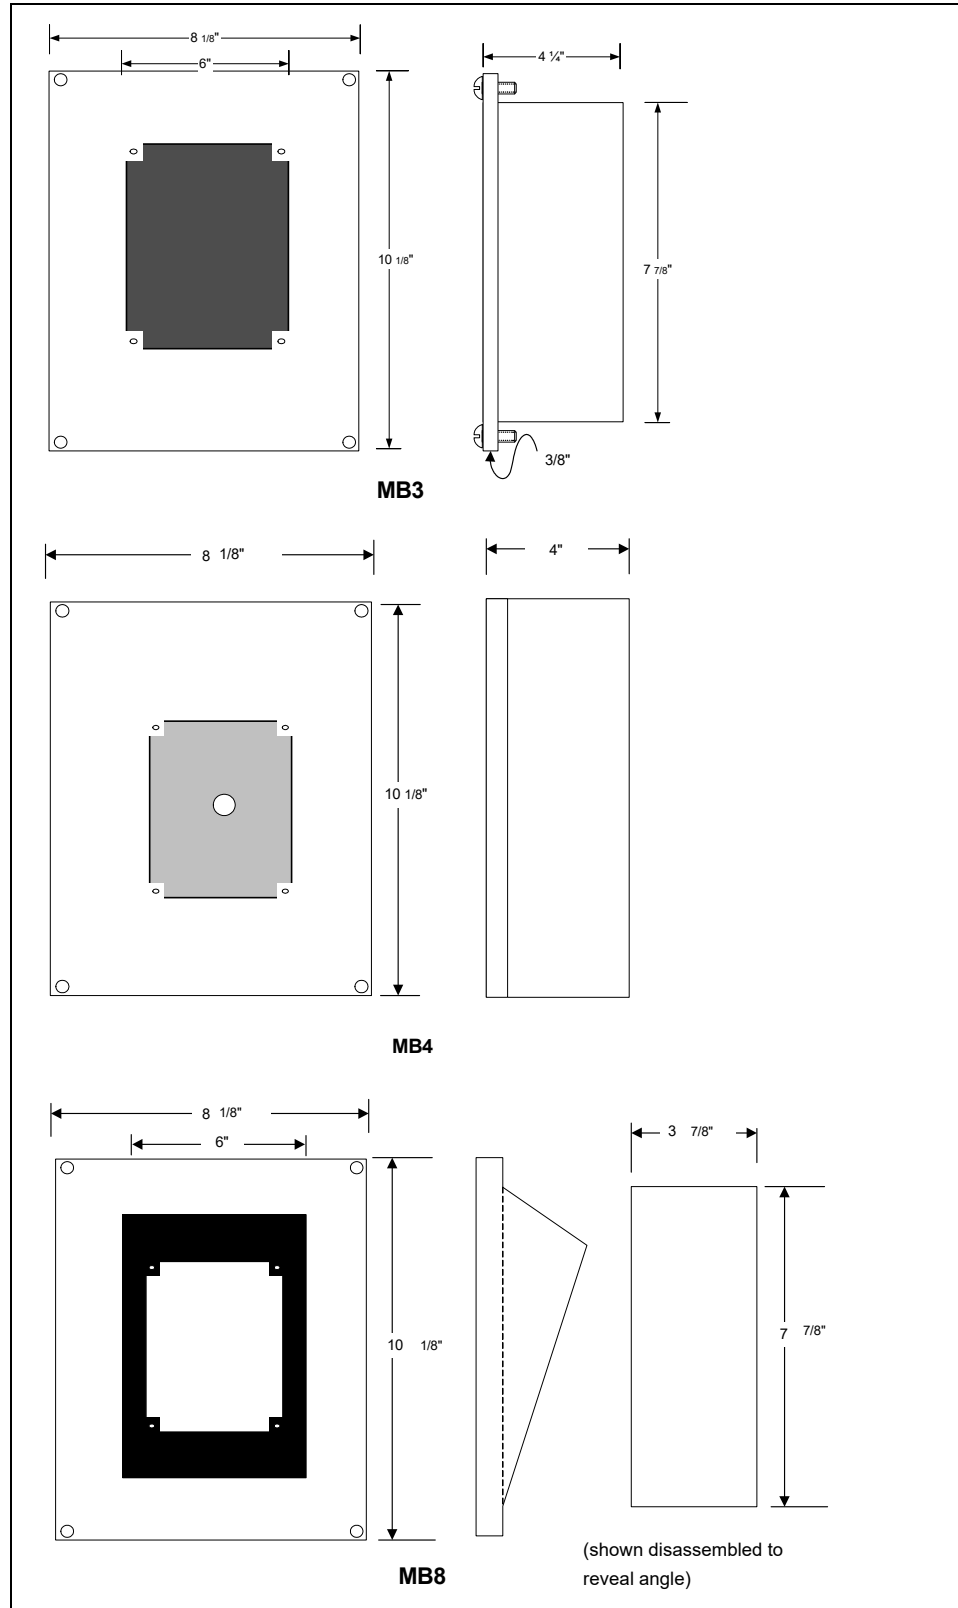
ScramblePad Mounting Boxes Dimensions - MB3, MB4 & MB8
